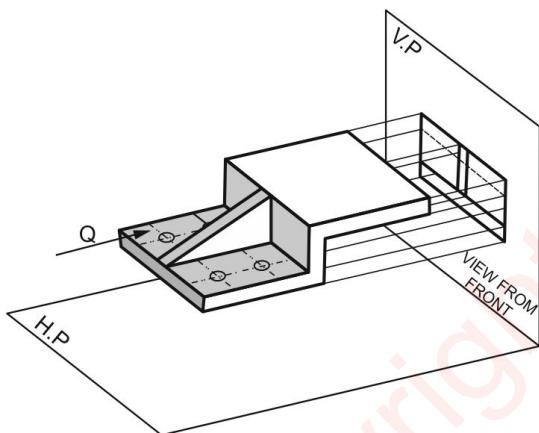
Pictorial drawing showing view from front of the clamping fixture
